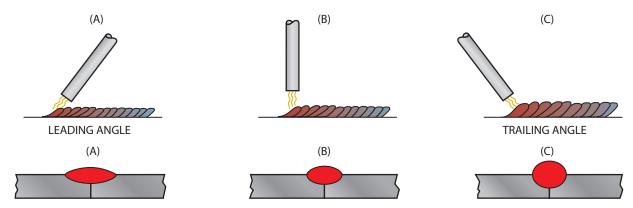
Effect of rod angle on weld bead shape. (A) Leading angle. (B) Perpendicular. (C) Trailing
